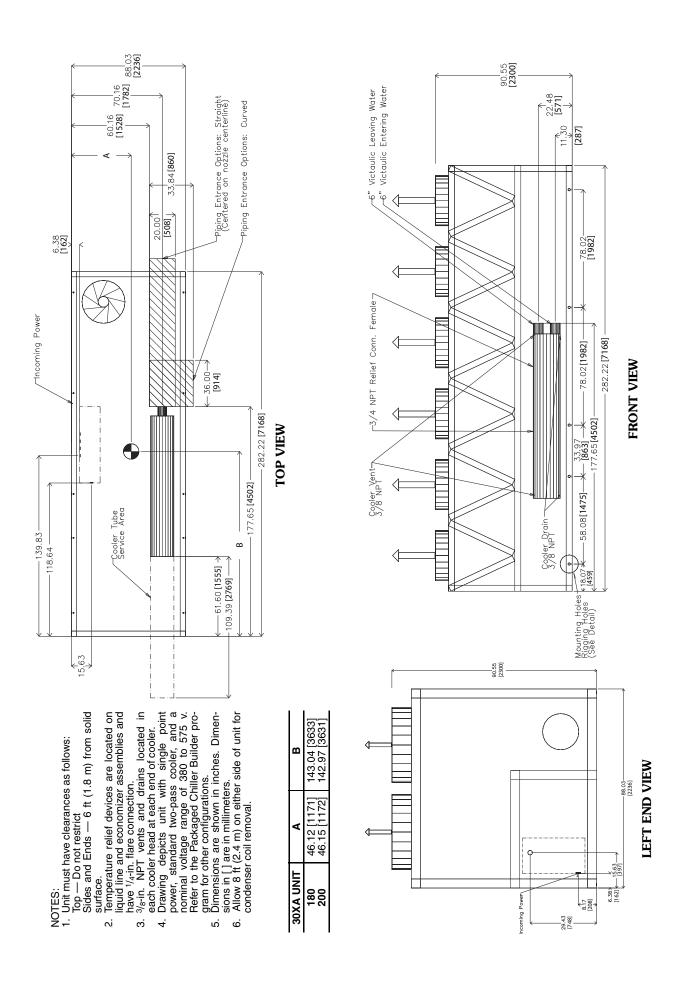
30XA180,200 Air-Cooled Liquid Chiller Dimensions
